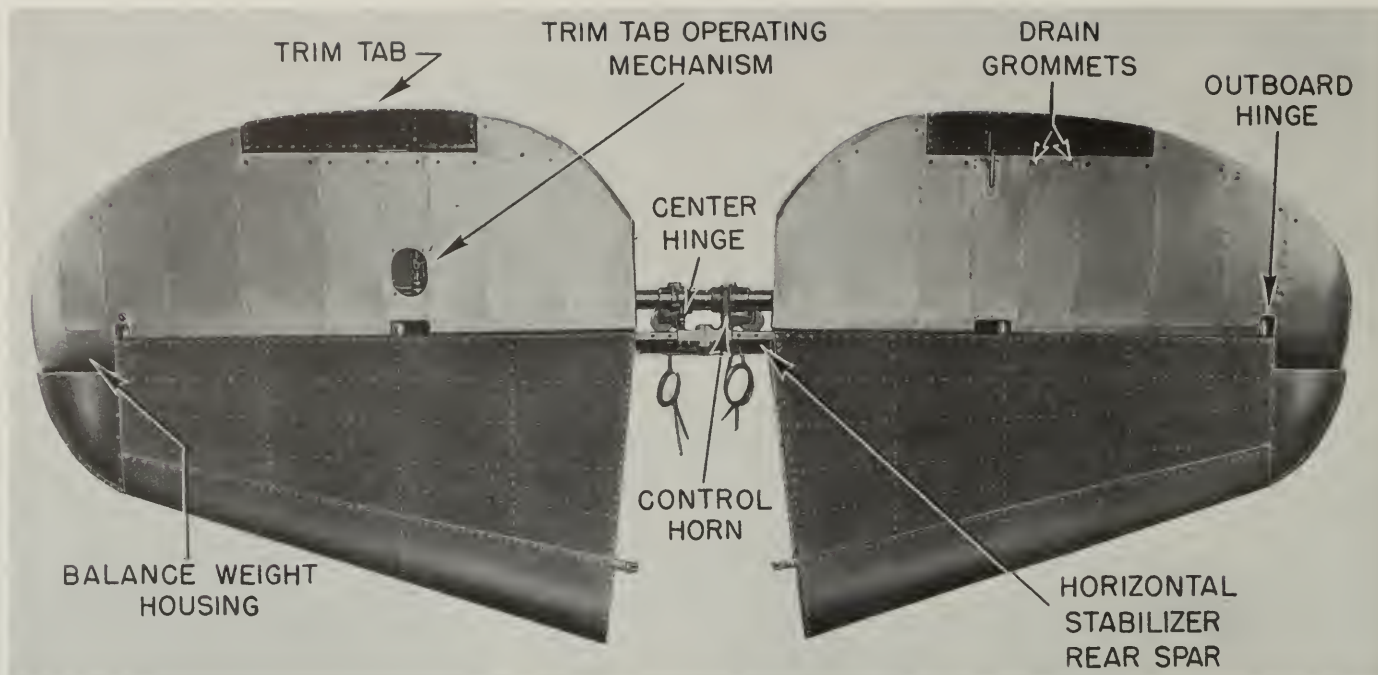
Elevators Installed on Complete Horizontal Stabilizer
